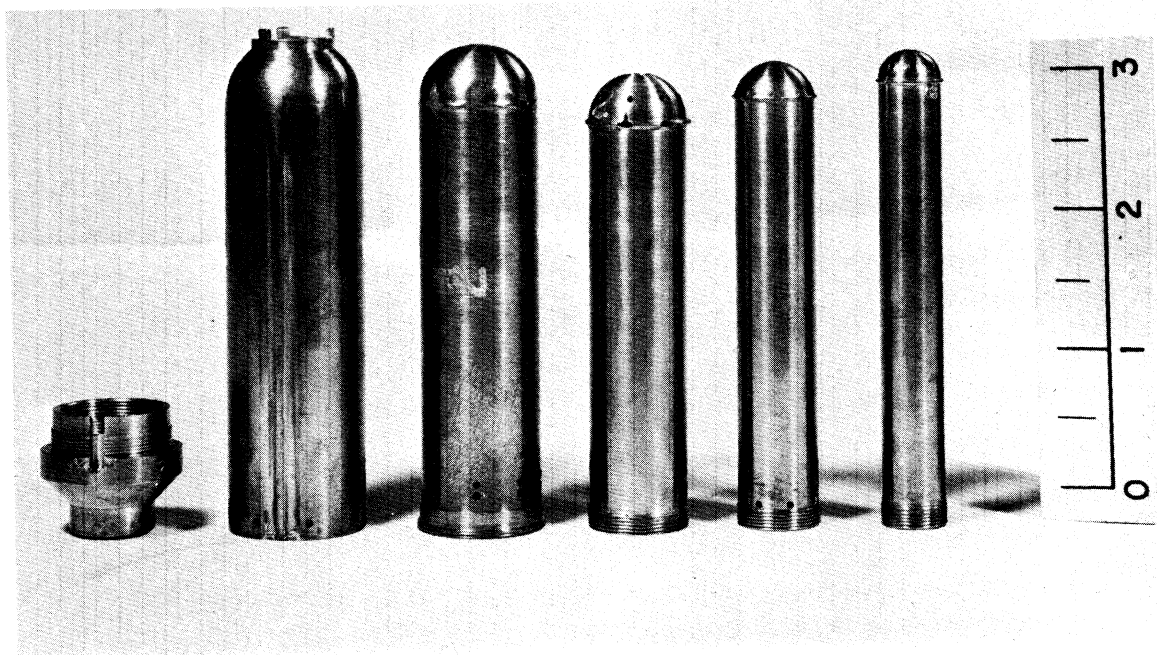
View of the Parts of the Modified Heater Capsule.
